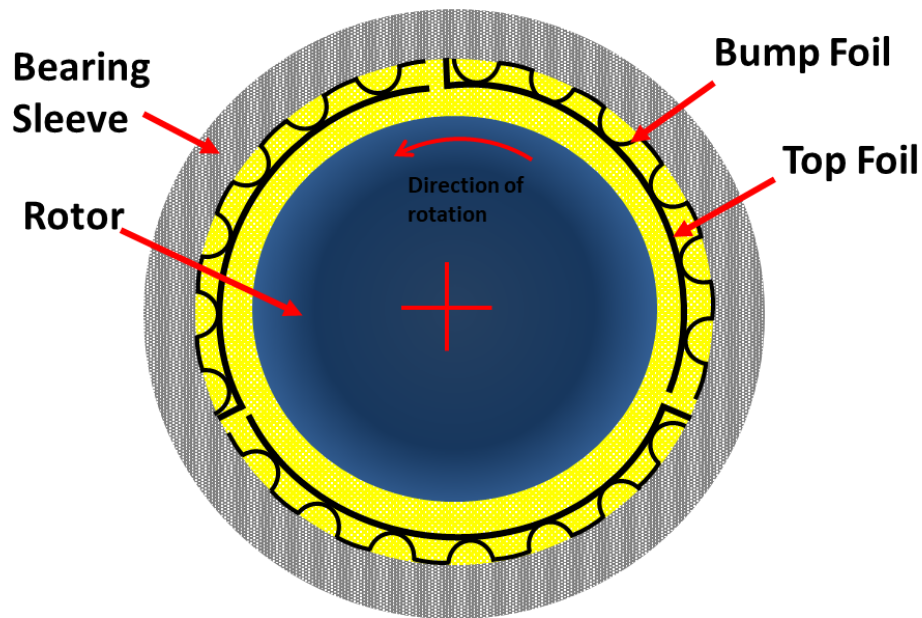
Schematic of a three-pad bump type air foil bearing
